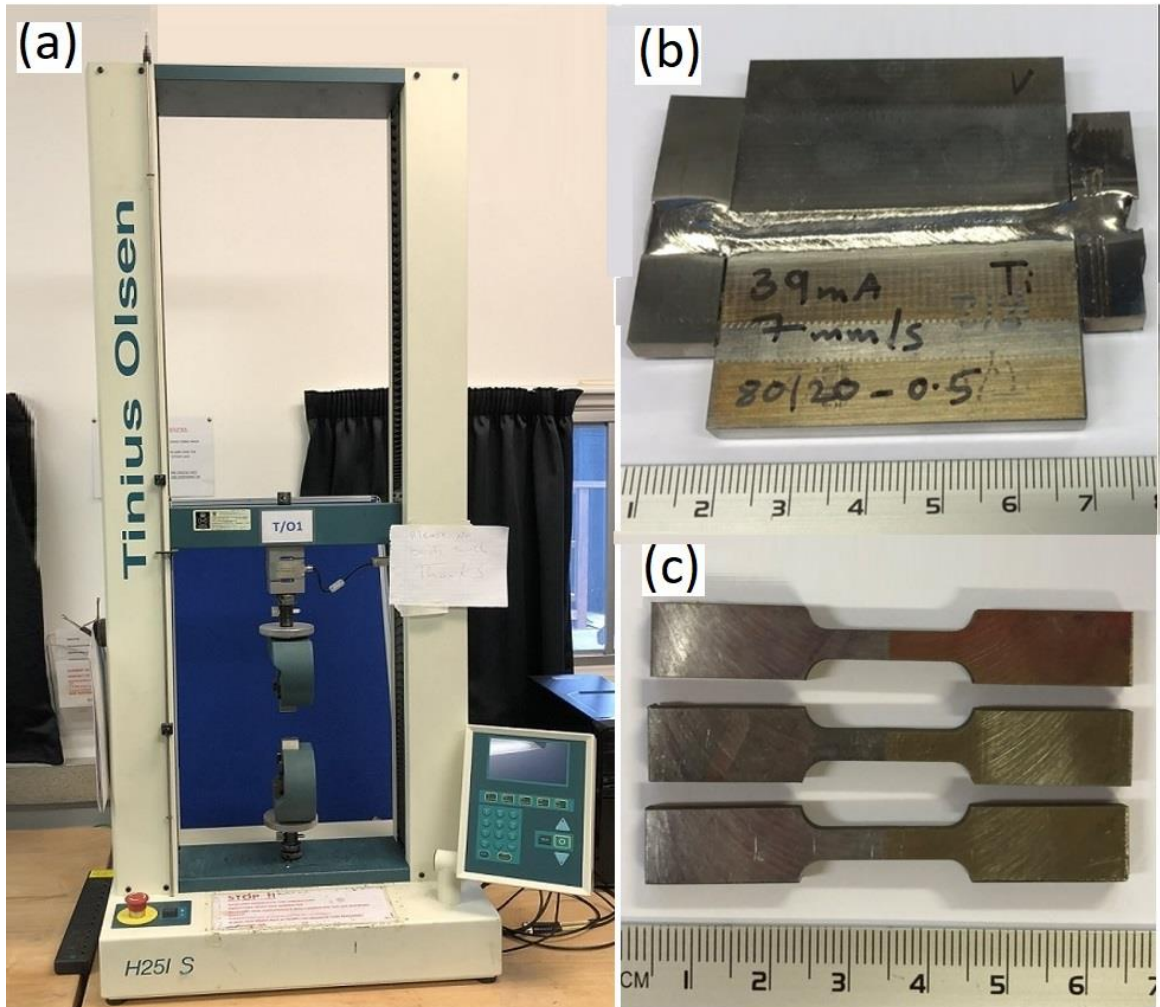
Shows (a) the tensile test machine used to carry out the tension test, (b) a dissimilar welded sample and (c) the extracted tensile specimen.
